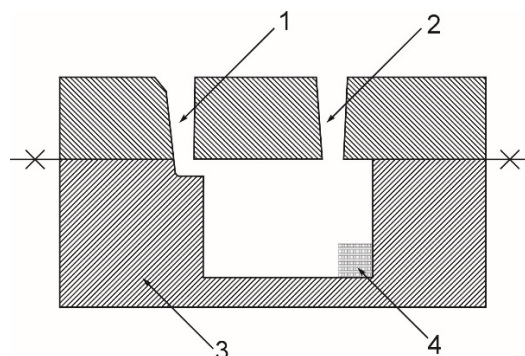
Mold technology diagram for layered castings: 1 – gating system, 2 – overflow, 3 – molding sand, 4 – titanium insert
